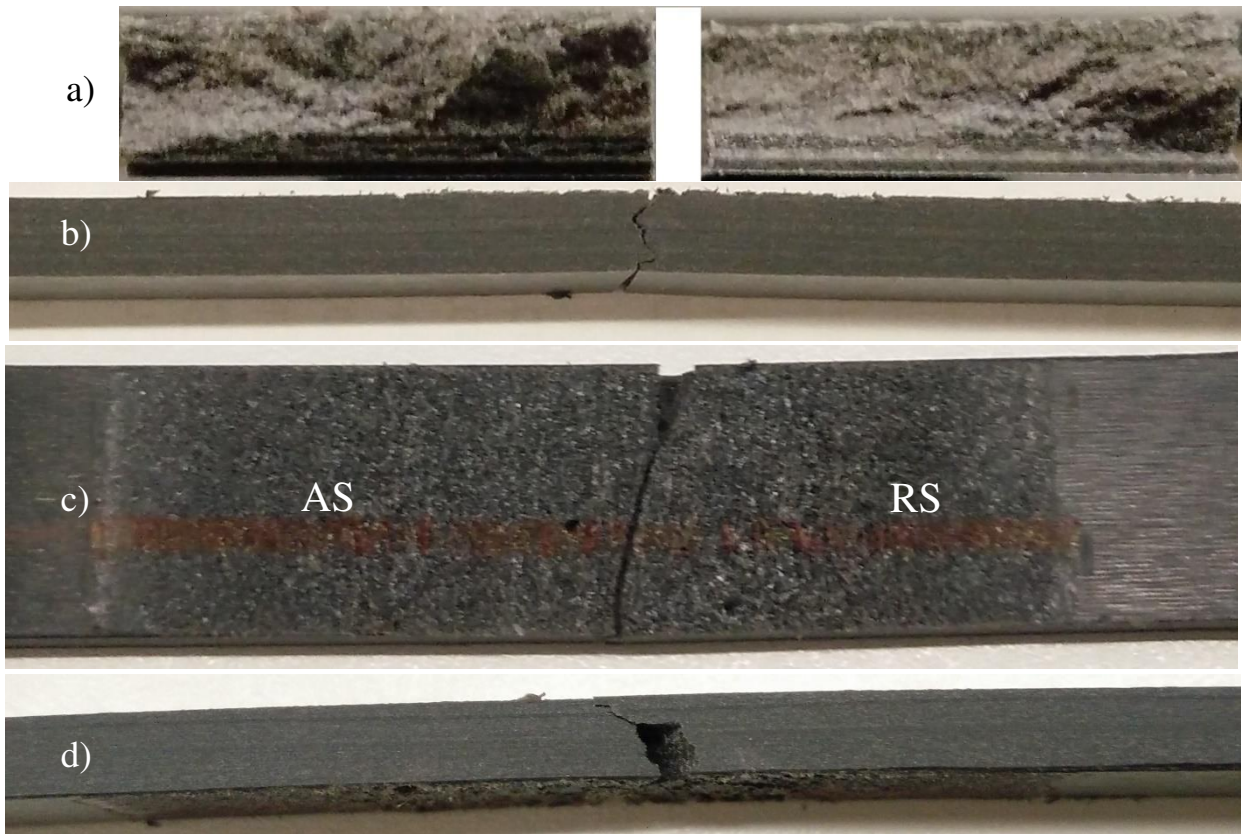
Specimens H4 a) fractured section, b) front view, c) top view and d) back view
